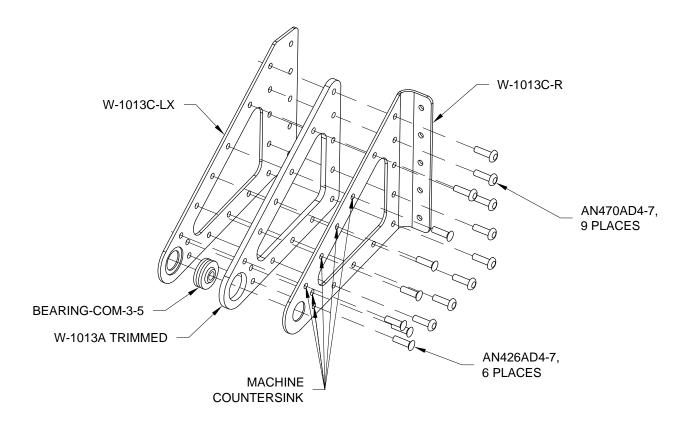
OUTBOARD AILERON BRACKET ASSEMBLY
